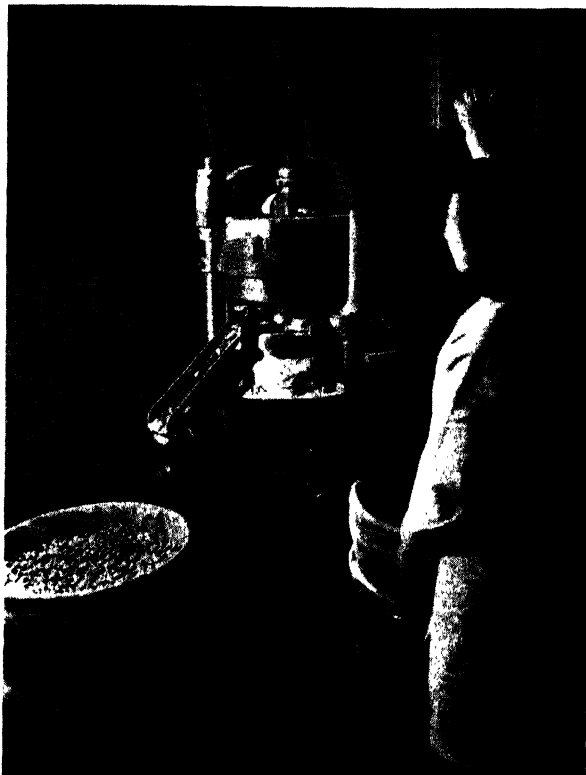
Pelleting or preforming machine<sup>6</sup>
